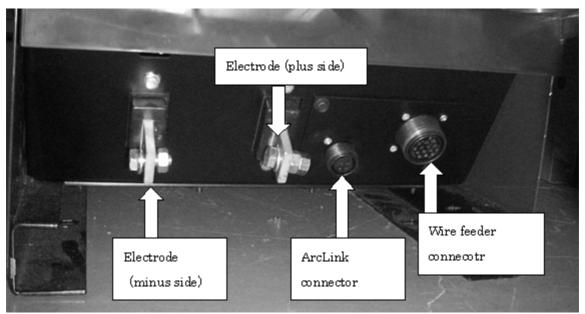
(d) Connection interface of welding power supply of ROBOWELD iC/E (Invertec CV350-R)
